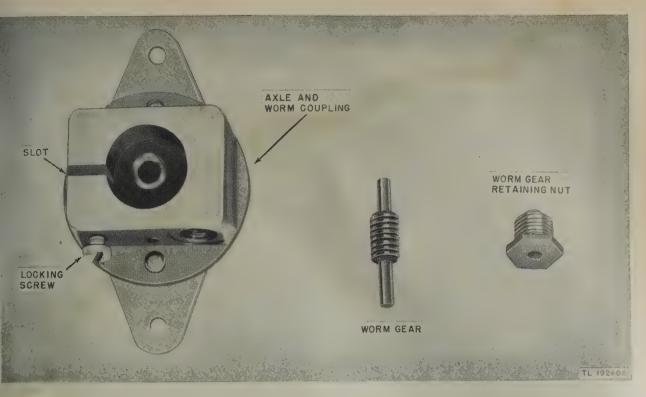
Bearing Indicator BC-1159-A, axle and worm assembly,
